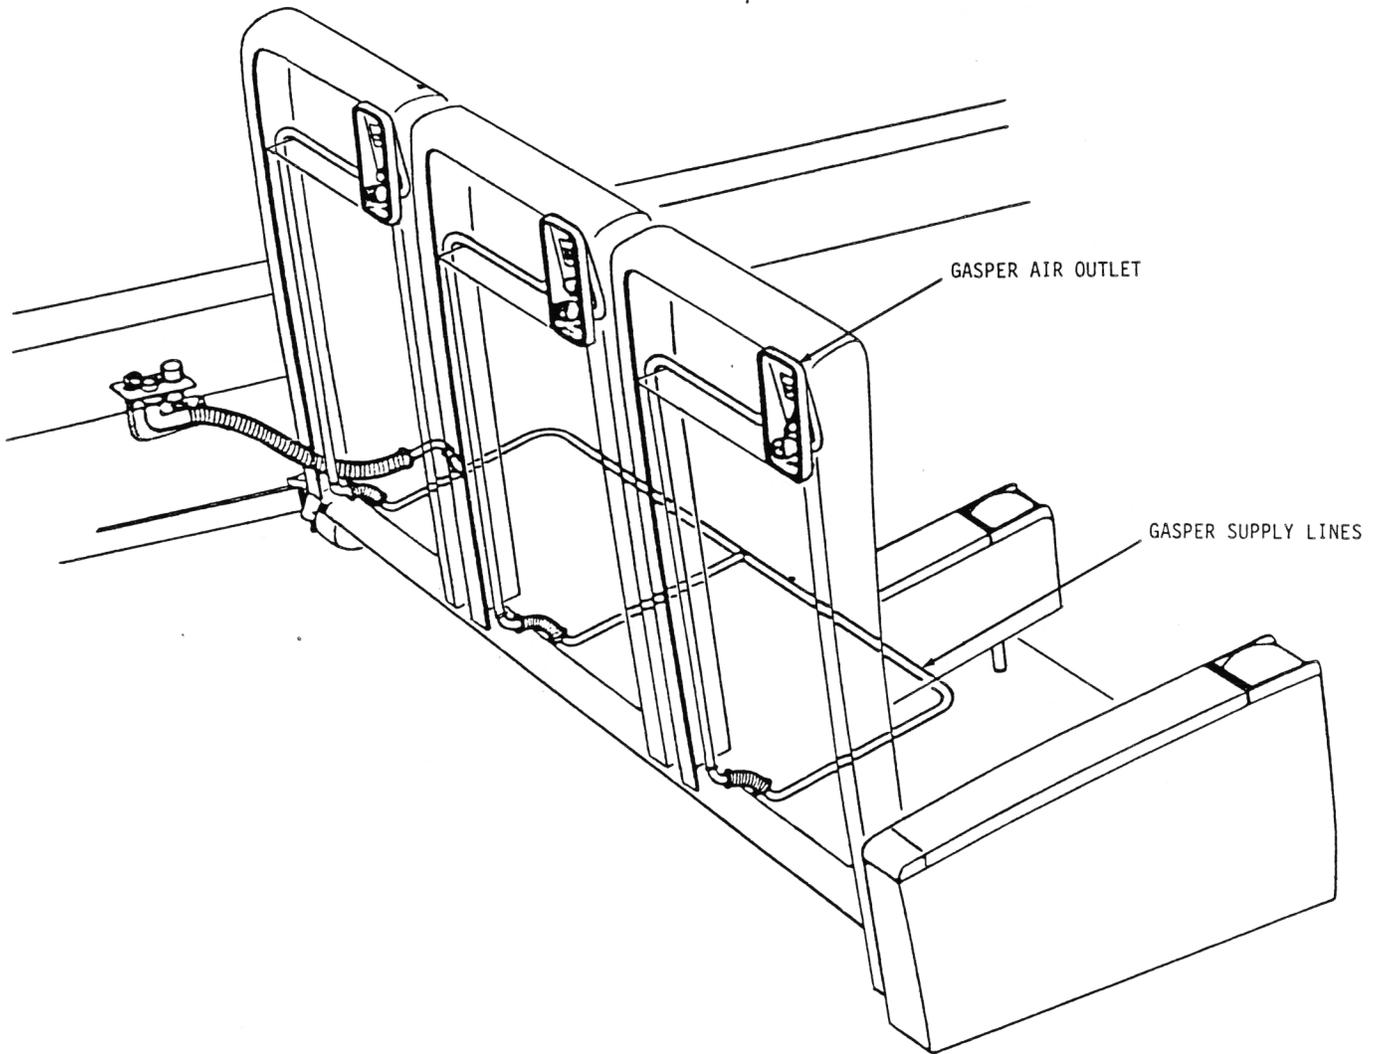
DC-8 PASSENGER CABIN AIR SEAT OUTLETS
